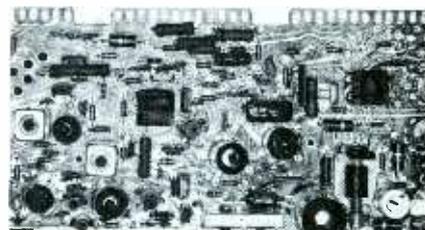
Printed board in a Motorola portable can be completely unplugged.
